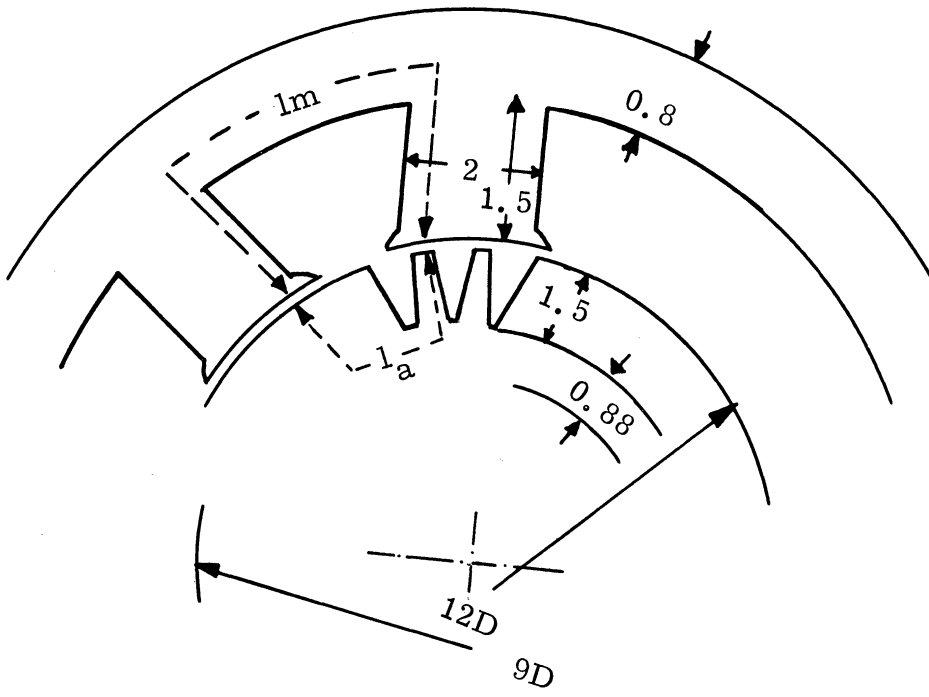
Motor detailed dimensions. All dimensions are in inches.
